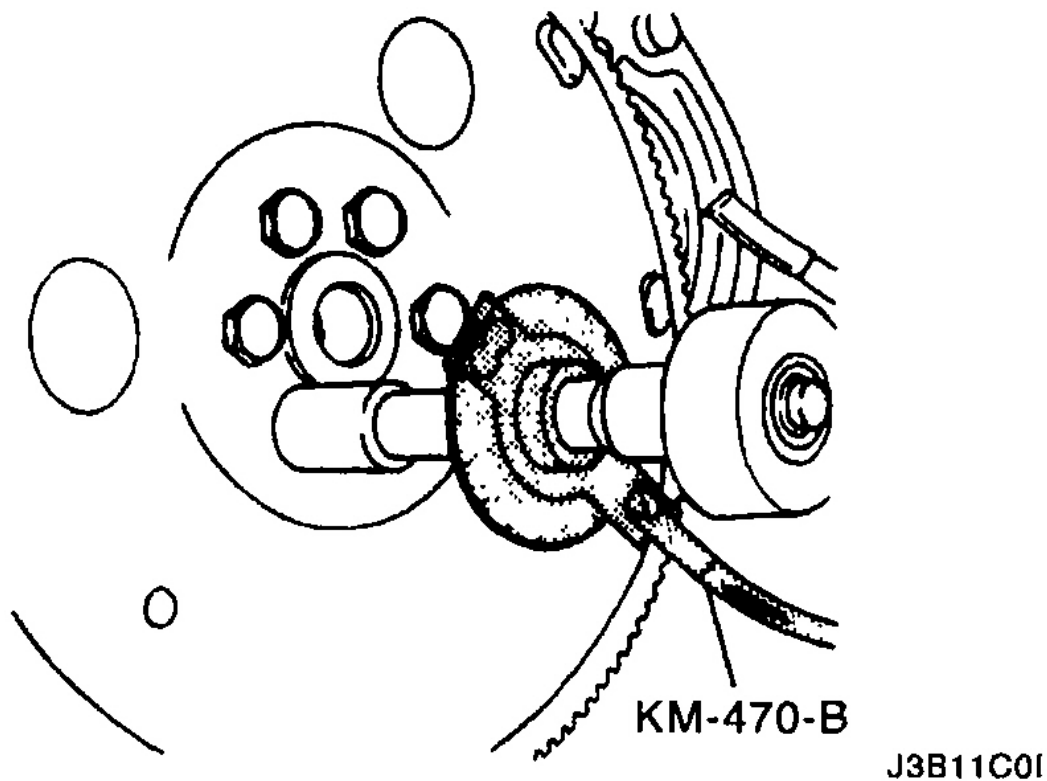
Installing Flywheel Or Flexible Plate Bolts
